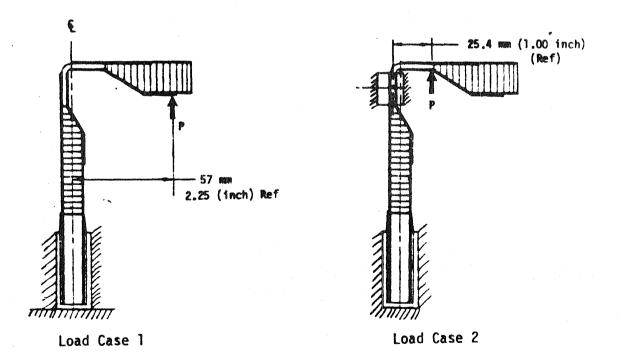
TASK 1.4 - TYPE 2 BONDED JOINT STATIC LOADING CONDITIONS
